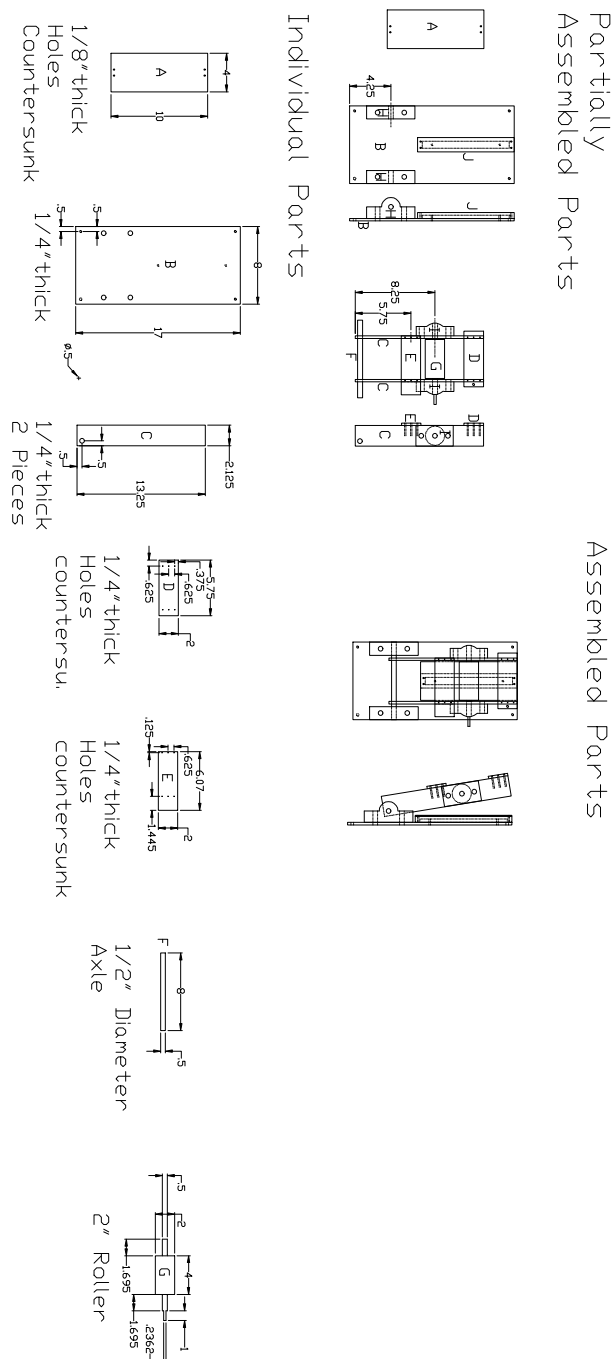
Drawing of buffing machine, comprising the stage (A), platform (B), drum assembly (C)–(F), roller (G), pillow block drum assembly bearings (H), drum bearings (I), linear stage bearing (J), and stage motor bearing (K).
